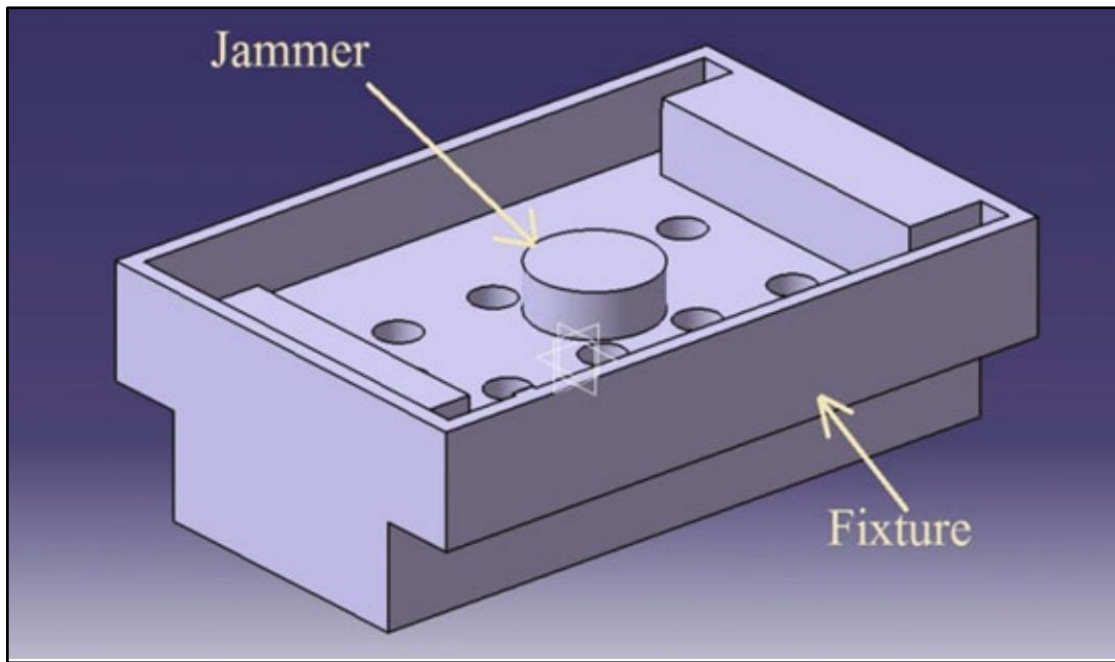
Schematic diagram of workpiece holding unit for laser transmission micromachining
